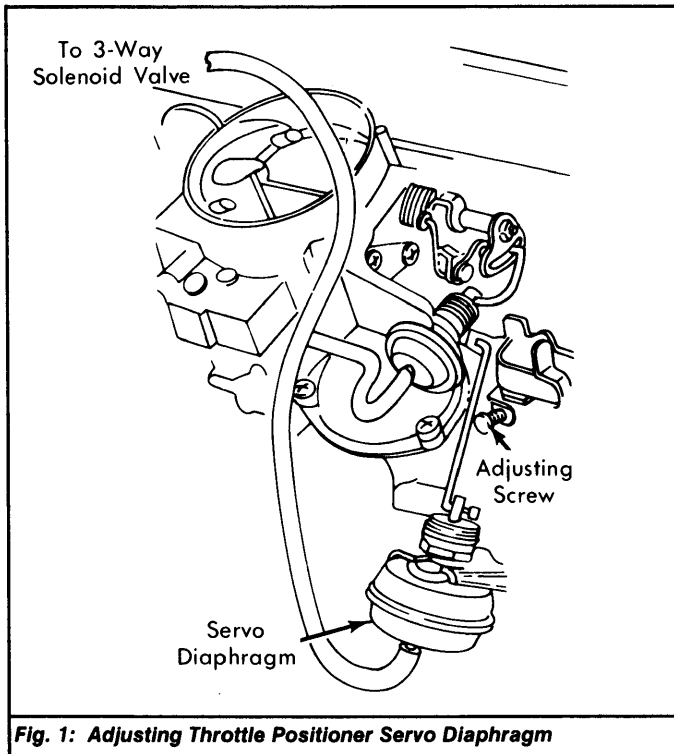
Adjusting Throttle Positioner Servo Diaphragm
